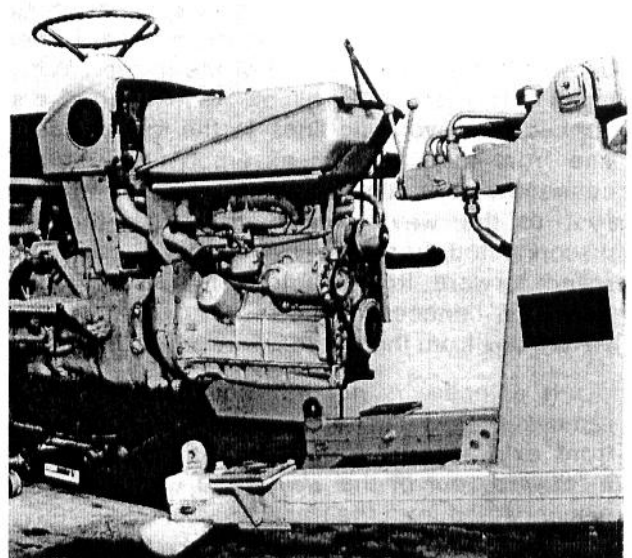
ENGINE, TRANSMISSION AND CENTER HOUSING ROLLED AWAY AS A UNIT FROM LOADER — GASOLINE ENGINE SHOWN
